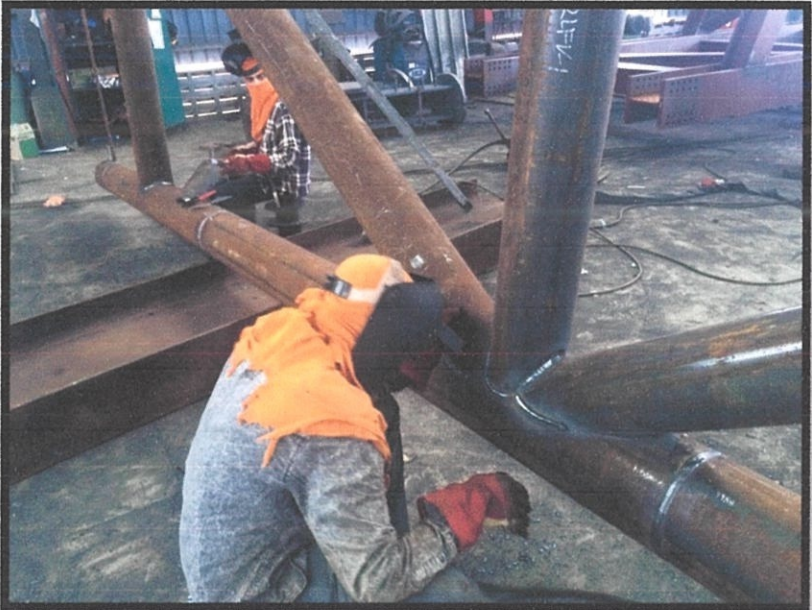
Grinding process to smoothen the surface and to remove excess welding material.
